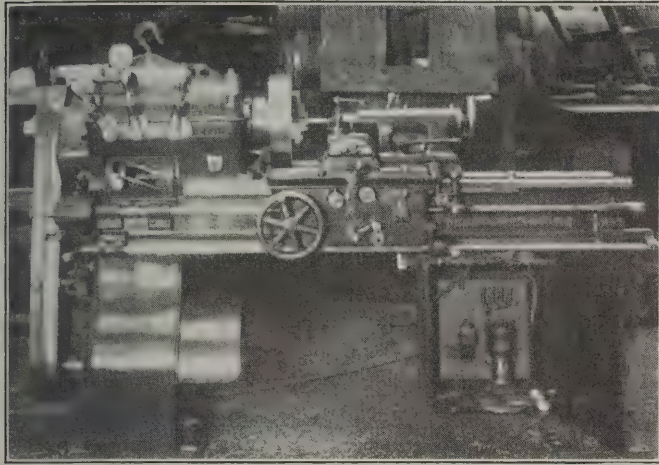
Portable Lathe With Controller Equipment on Lathe
